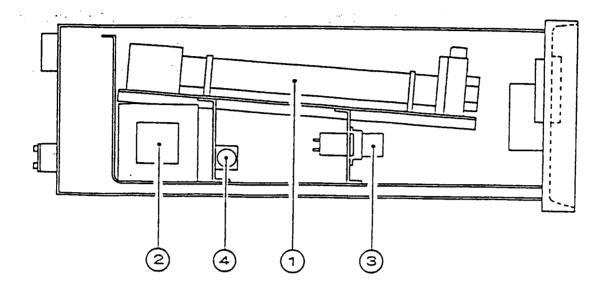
Major Internal Components - Optical Bench Side. (Shown with cover removed).
